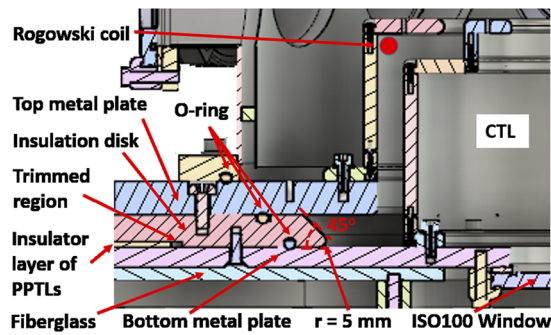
Detailed CAD drawing for the high-voltage feedthrough.
